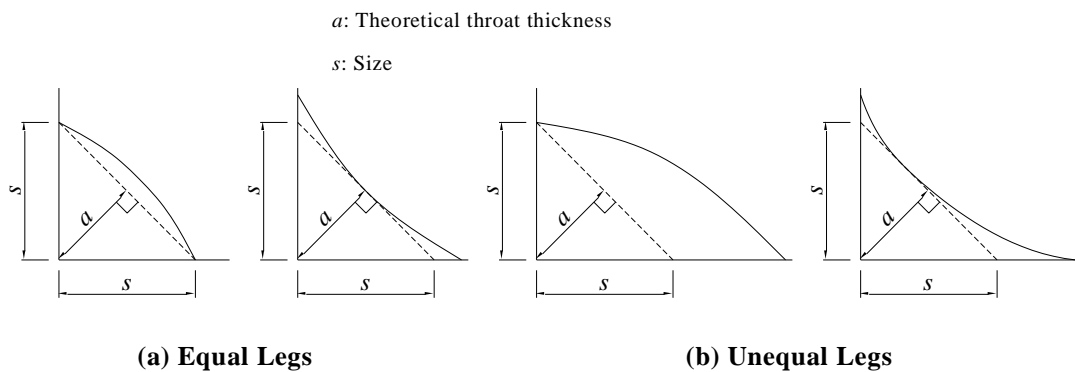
Theoretical Throat Thickness and Size in Fillet Welding
